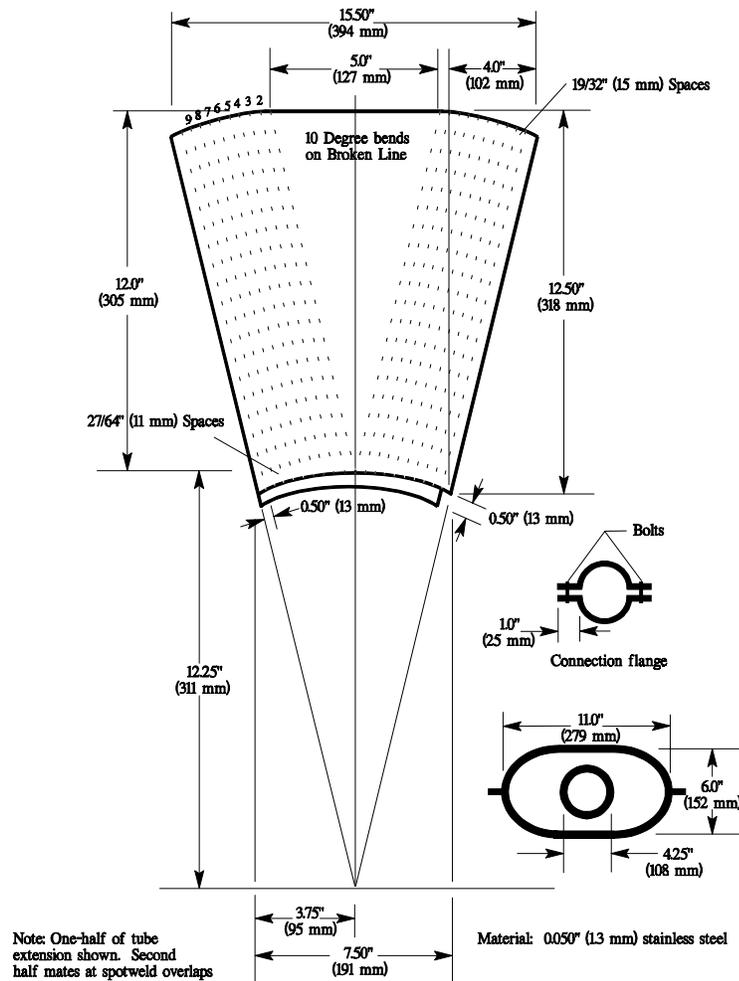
BURNER DRAFT TUBE EXTENSION CONE
